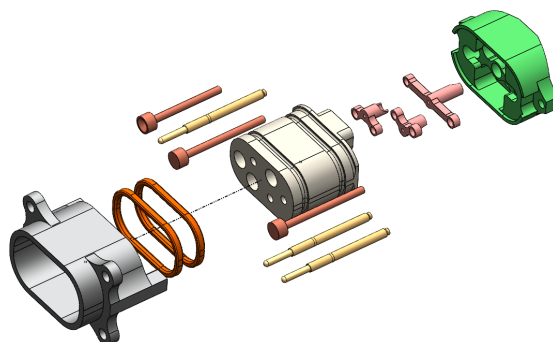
Figure 3 – Exploded view of the GRASP Power Connector, with targets, dampers, and pin couplers visible.
